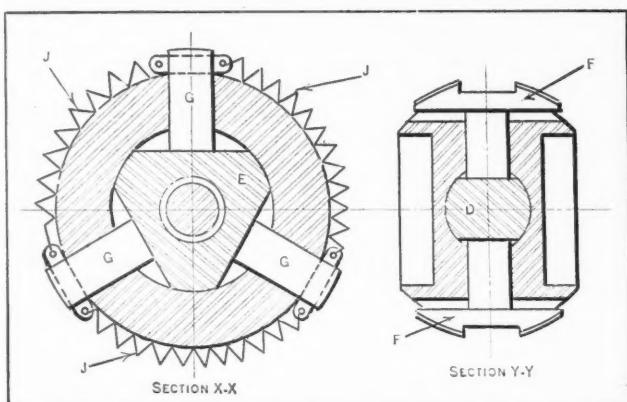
Sectional Views of the Piston-holding Chuck Shown in Fig. 1
